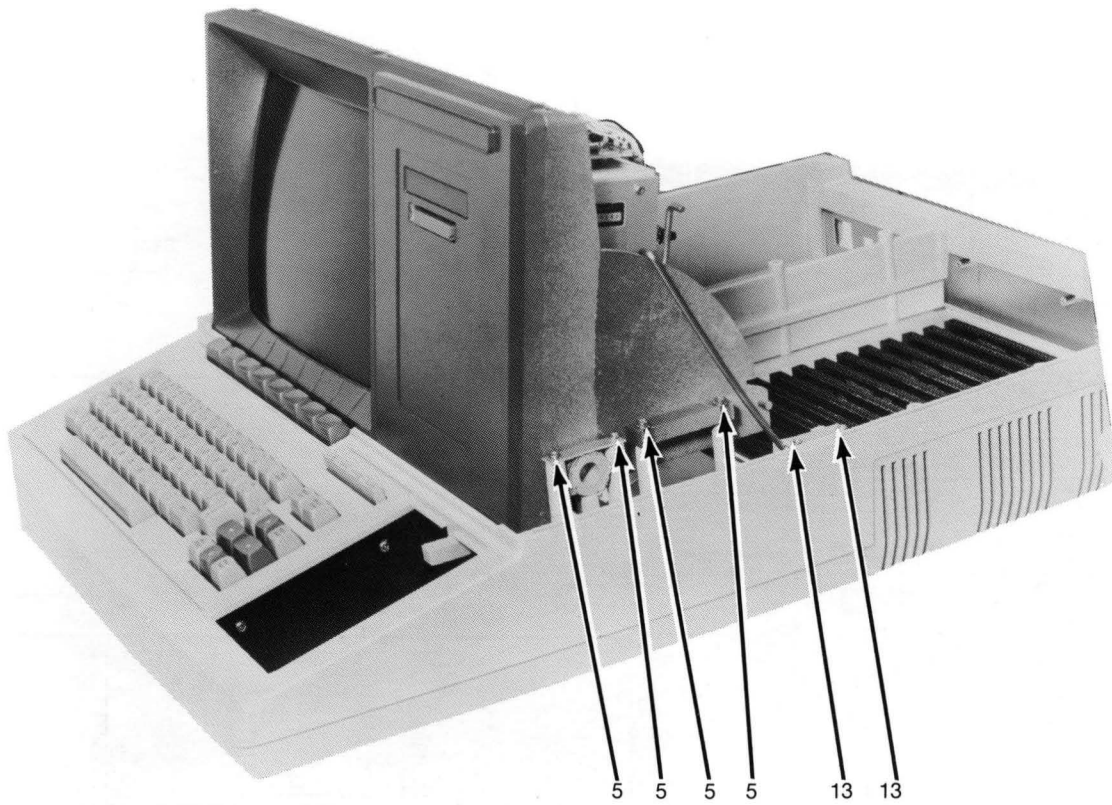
Mainframe Attach Screw Locator (Sheet 3 of 7)
